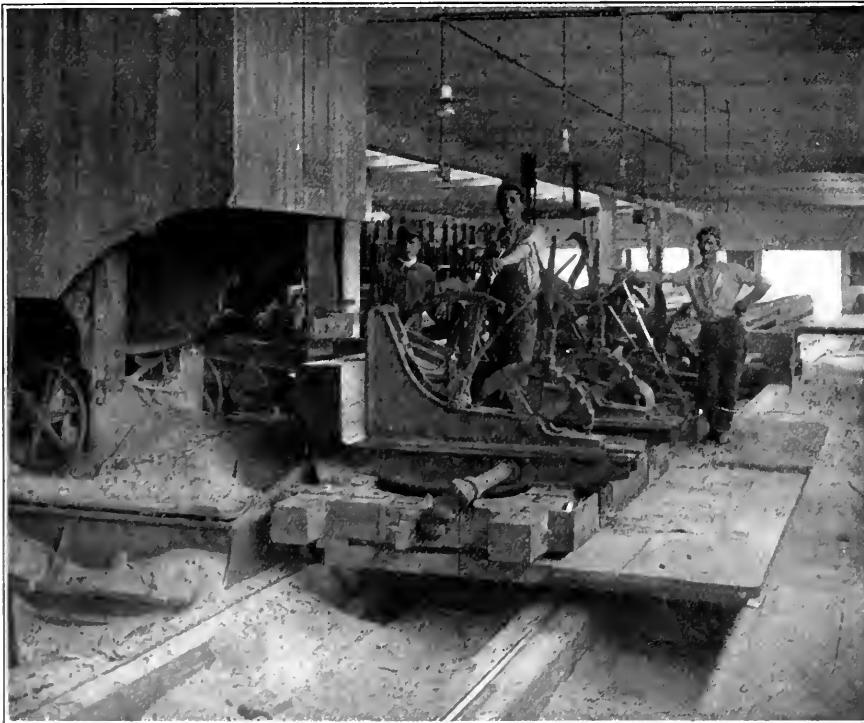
RIGHT-HAND BAND MILL DRIVEN BY 150-HORSEPOWER MOTOR
